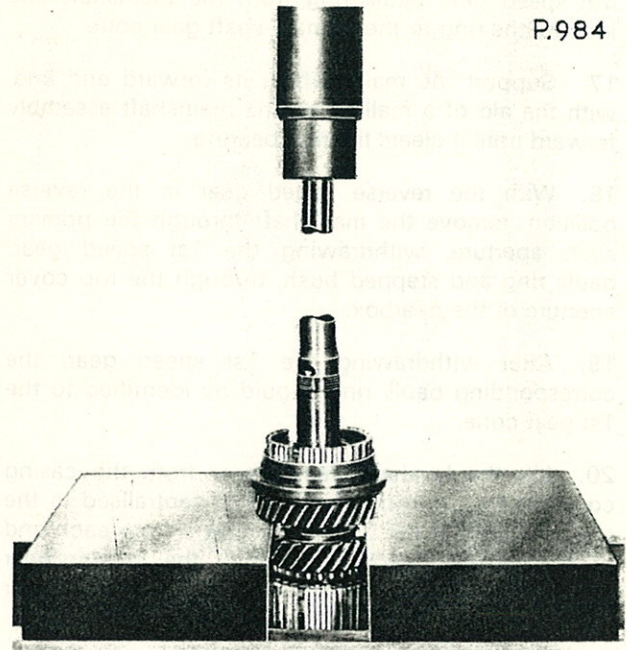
Pressing the 1st and 2nd synchro hub off the mainshaft
